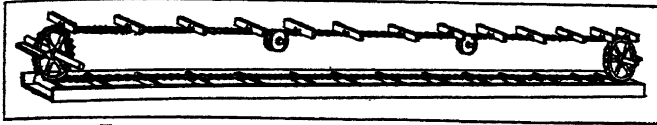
SIMPLE TYPE OF PUSH-PLATE CONVEYOR
